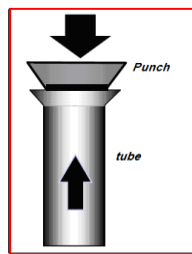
Principle operation of flare, penetration of the punch in the tube [8].
